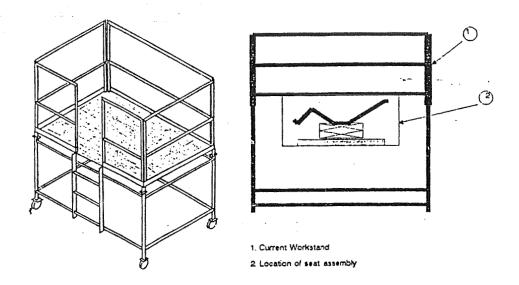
a. Current Workstand and suggested location for the seat assembly.
